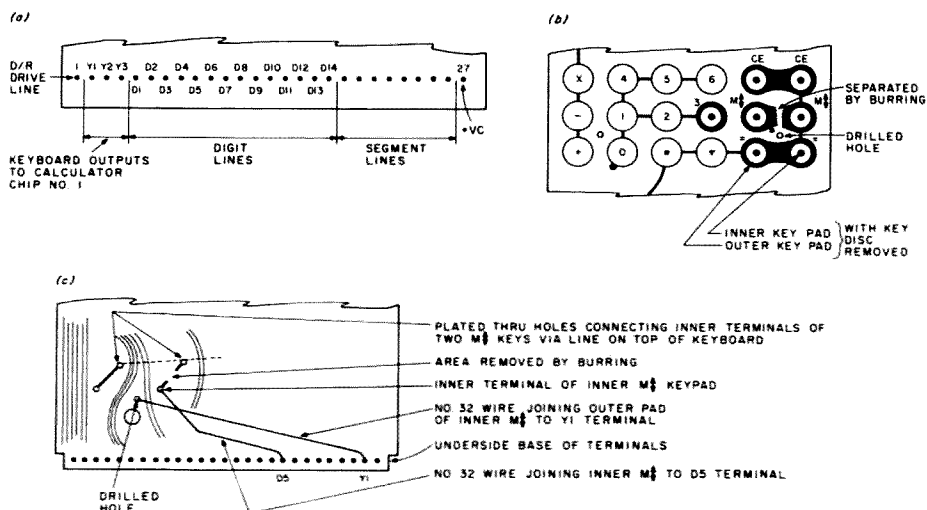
(a) Expanded view of the terminal strip showing digit and segment output lines. (b) A section of the top of the keyboard showing where the key discs have been removed, where the hole is drilled, and where the outer pads of the M \dagger keys have been separated by burring. (c) Bottom view of the keyboard showing the modifications.
